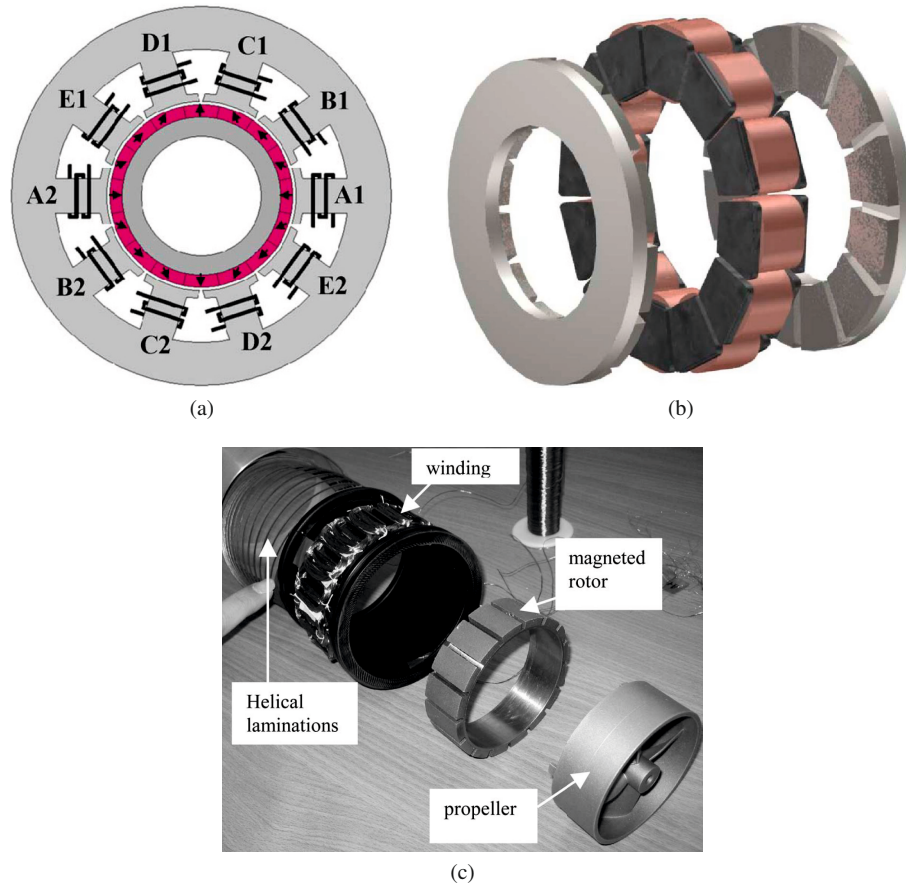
Other iPMM topologies: (a) Halbach machine [31]; (b) yokeless machine [32]; (c) slotless machine [33].
